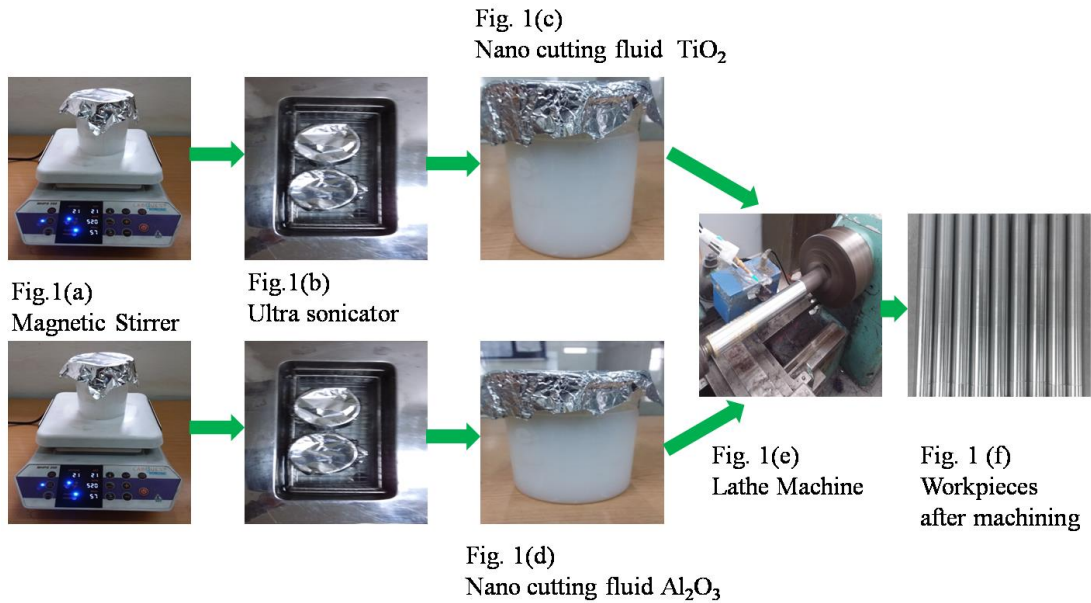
Illustration of major steps during preparation of nano cutting fluids and machining
